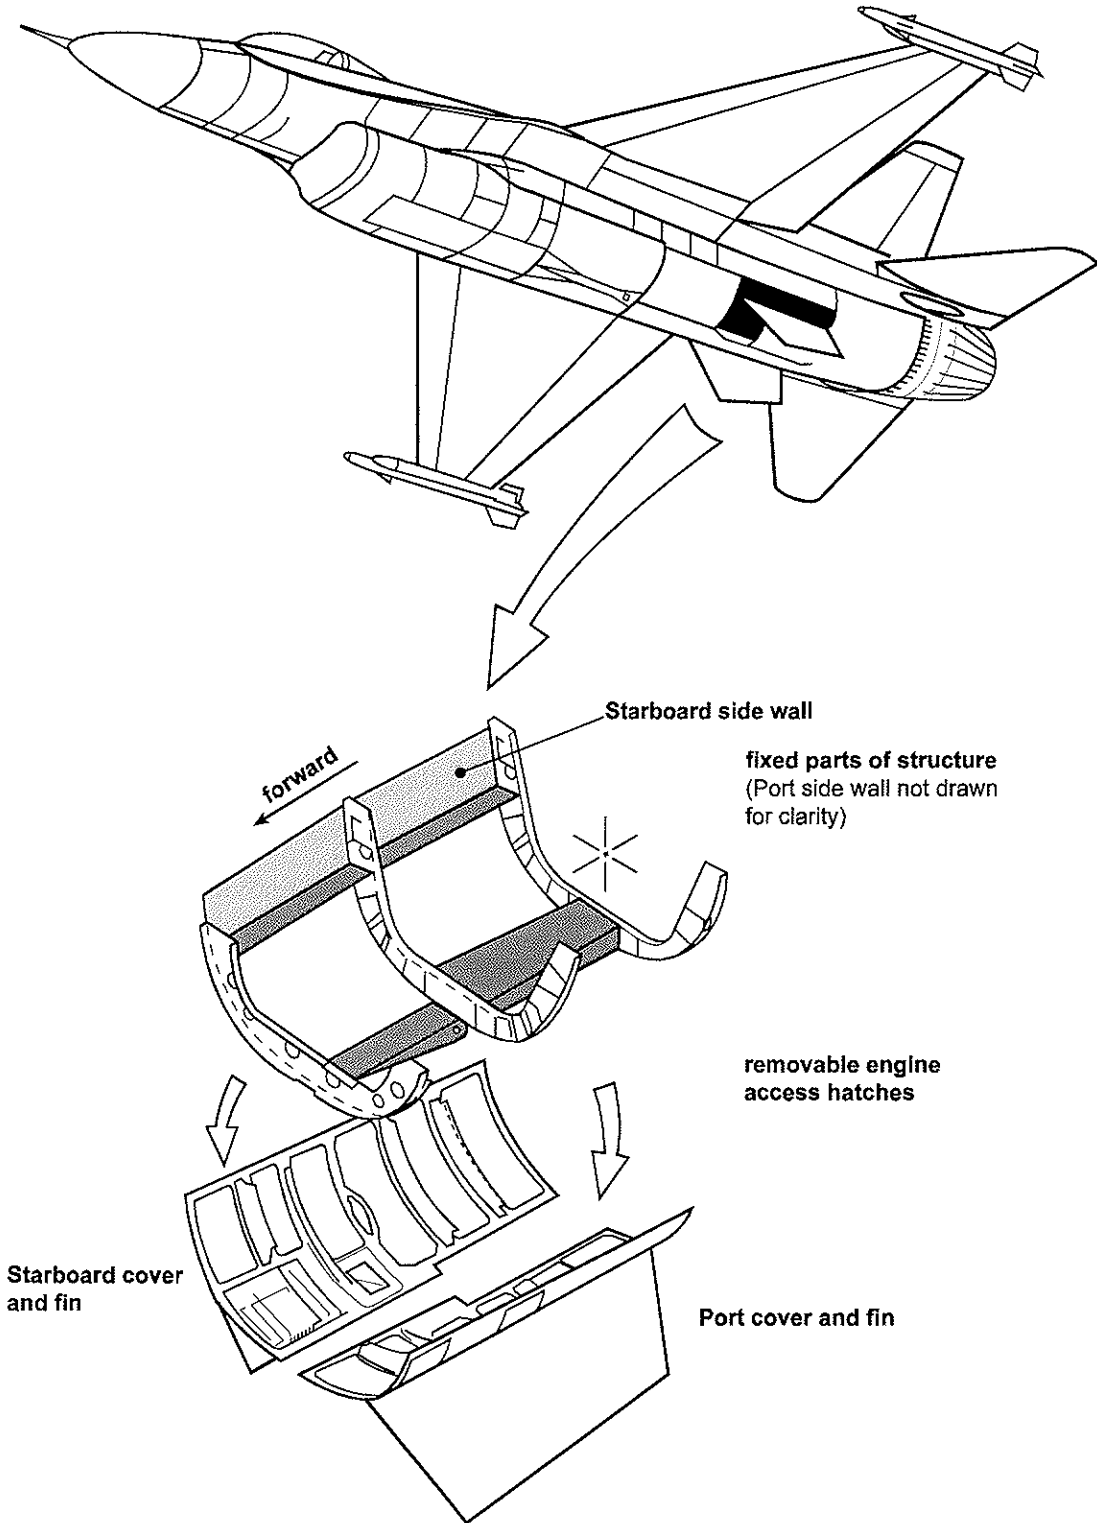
Exploded view of the lower half of the rear fuselage ventral fin section
